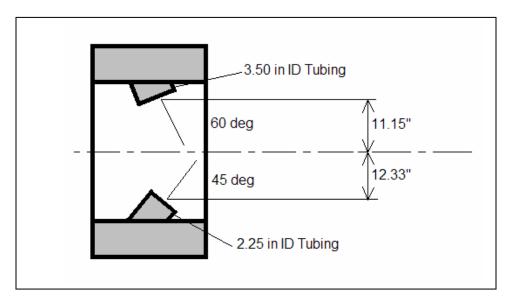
Mixer Plenum Geometry B - Mixer Inside Windbox
